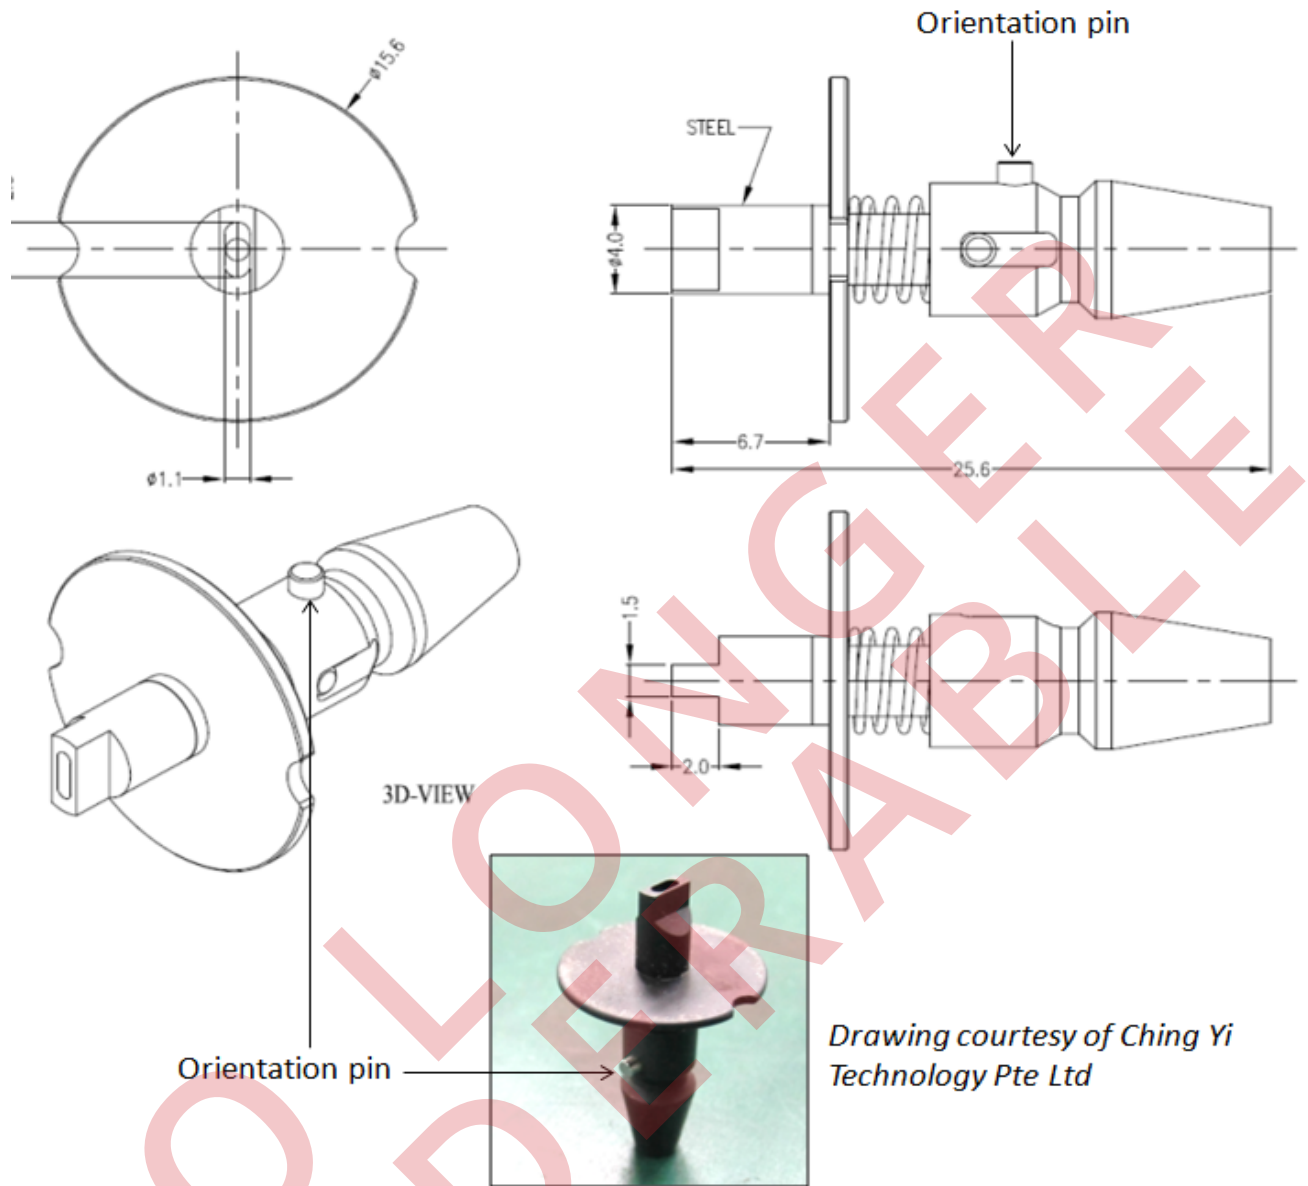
A customized nozzle for Samsung SM421 pick and place machine with pick up contact area closely matching the shaded area in Figure 6.
